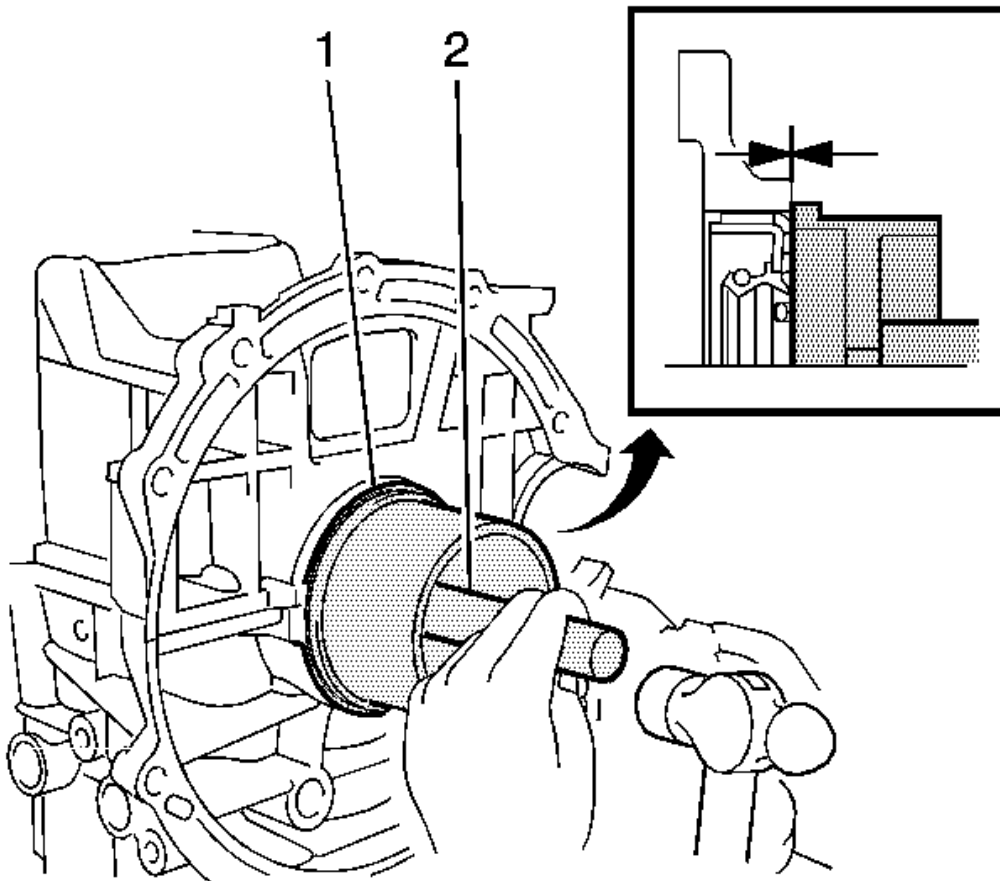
View Of Proper Oil Seal Cleaning & Installation
